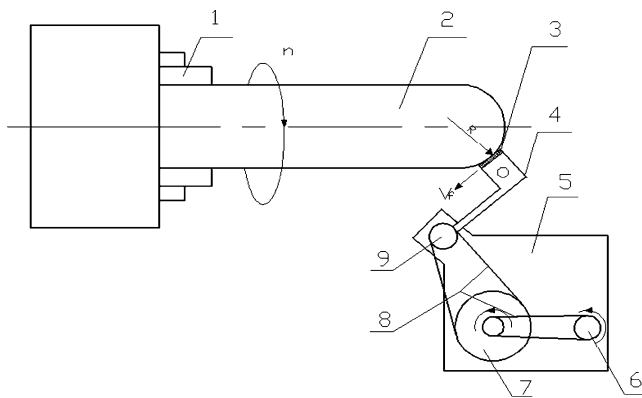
Polishing system with compliant control. 1 Turning chuck. 2 Workpiece. 3 Polishing saucer. 4 Polishing tool. 5 Tool post. 6 Electromotor shaft. 7 Torque servo device. 8 Synchronous belt. 9 Revolution shaft
